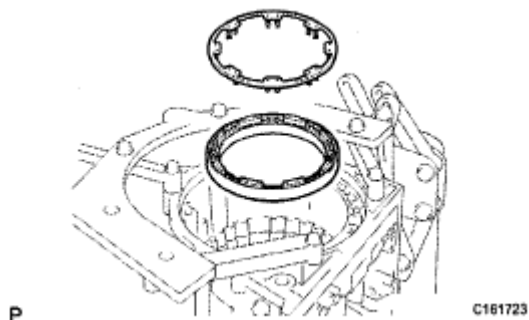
Identifying No. 1 Brake Cylinder With Piston And Brake Piston Return Spring To Transmission Case
